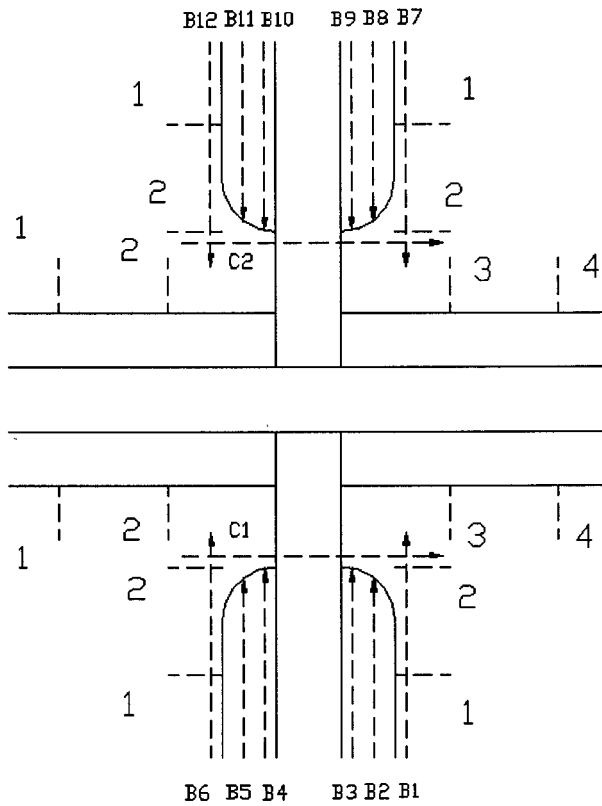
Scans of the Horizontal Weld into a Cut Out
